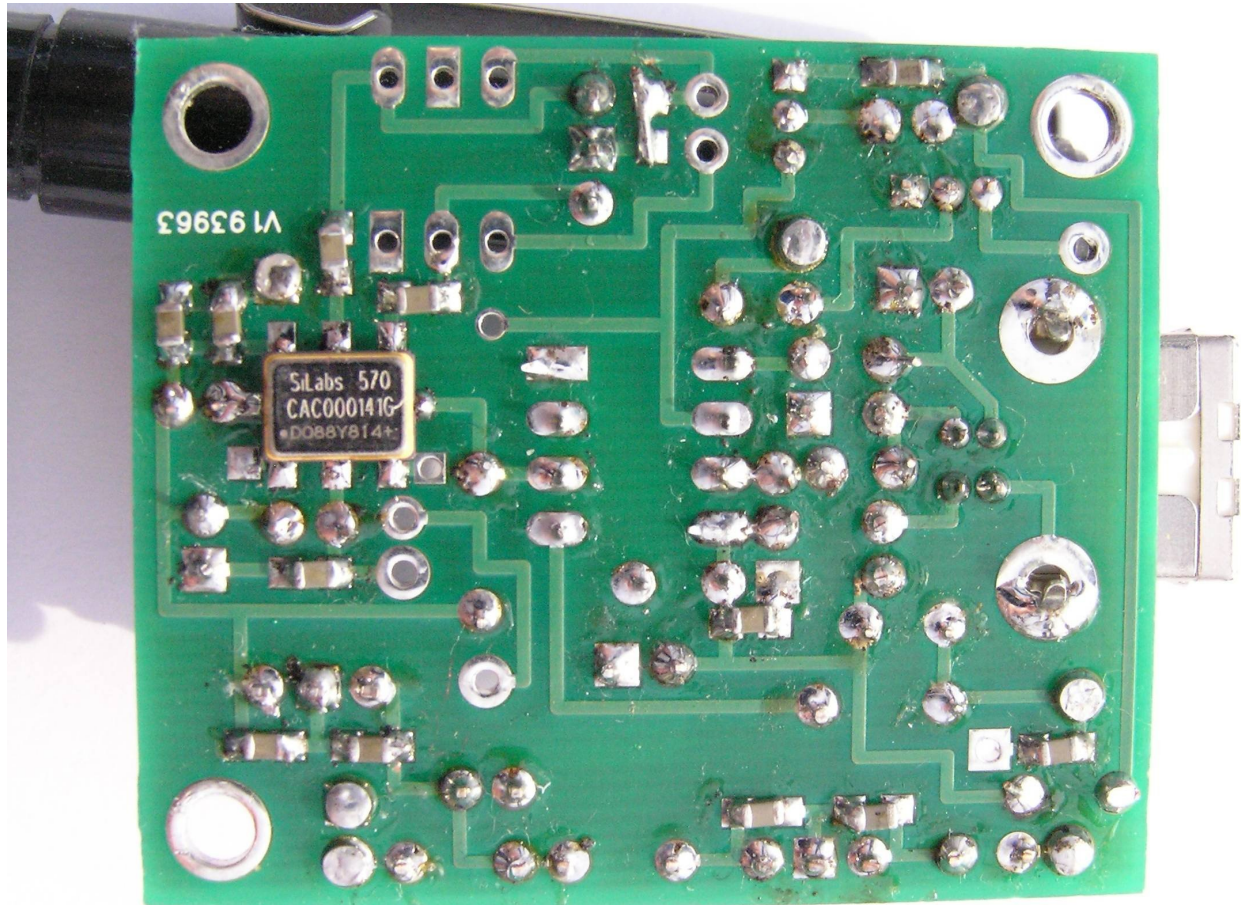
Photo of completed V2.03 PCB (bottom)USB-Synthesizer output configuration:
